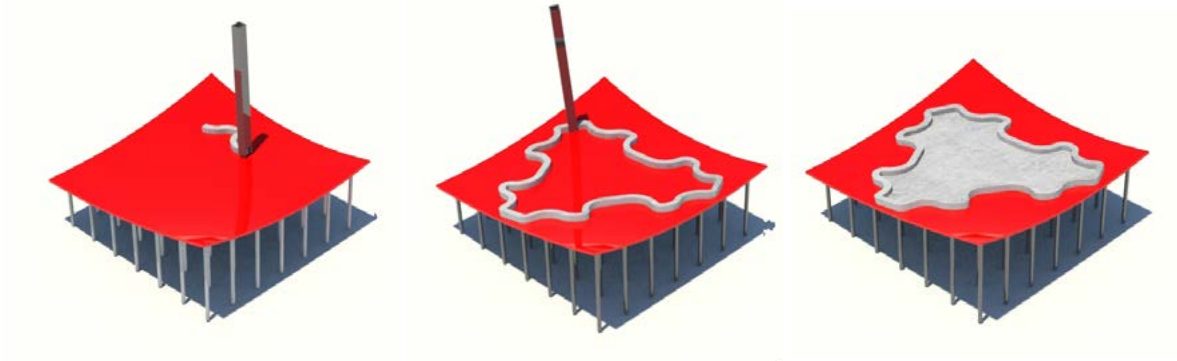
Process for fabricating Printed-and-cast-Panels.
